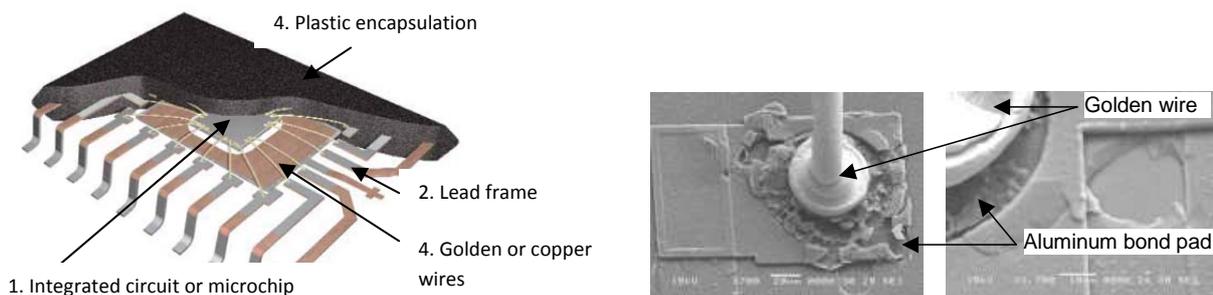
Schematic picture of plastic encapsulated device (left) and an example of aluminum bond pad corrosion (right)
